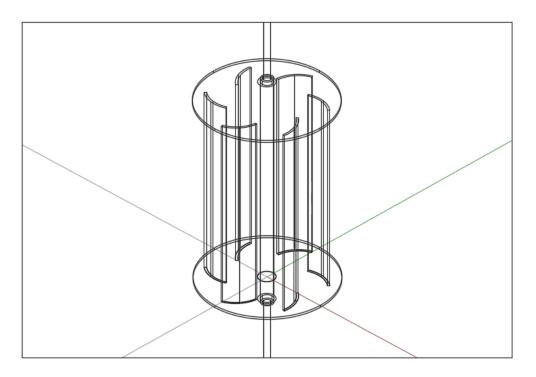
Draft 2 of Cross-Flow Turbine- 3D View (using AutoCAD)
